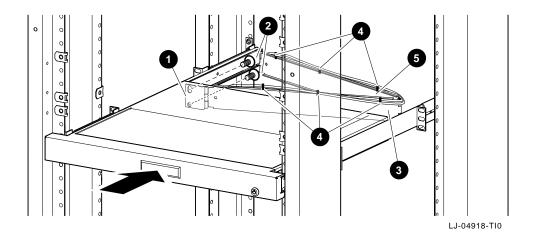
Attaching Cable Management Bracket to the Keyboard Tray Assembly and Attaching Keyboard and Mouse Cables
